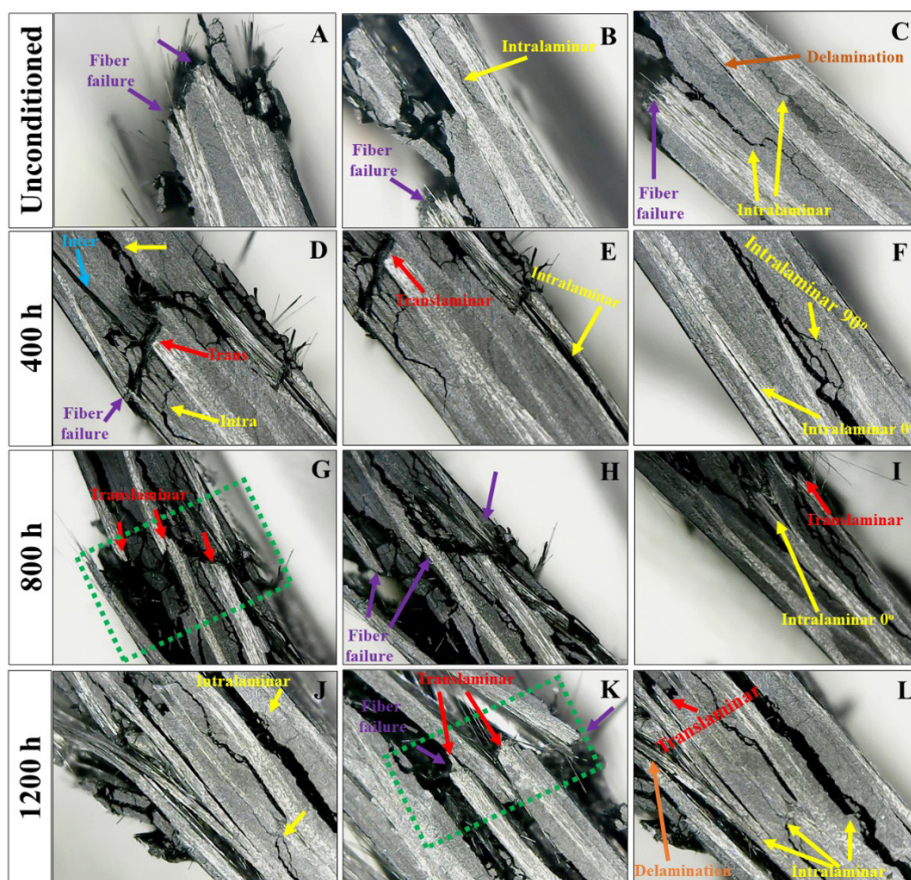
Representative macroscopic images of tensile fracture surface from the CF/PA6 composites unconditioned and after 400 h, 800 h, and 1200 h exposed to accelerated weathering.
